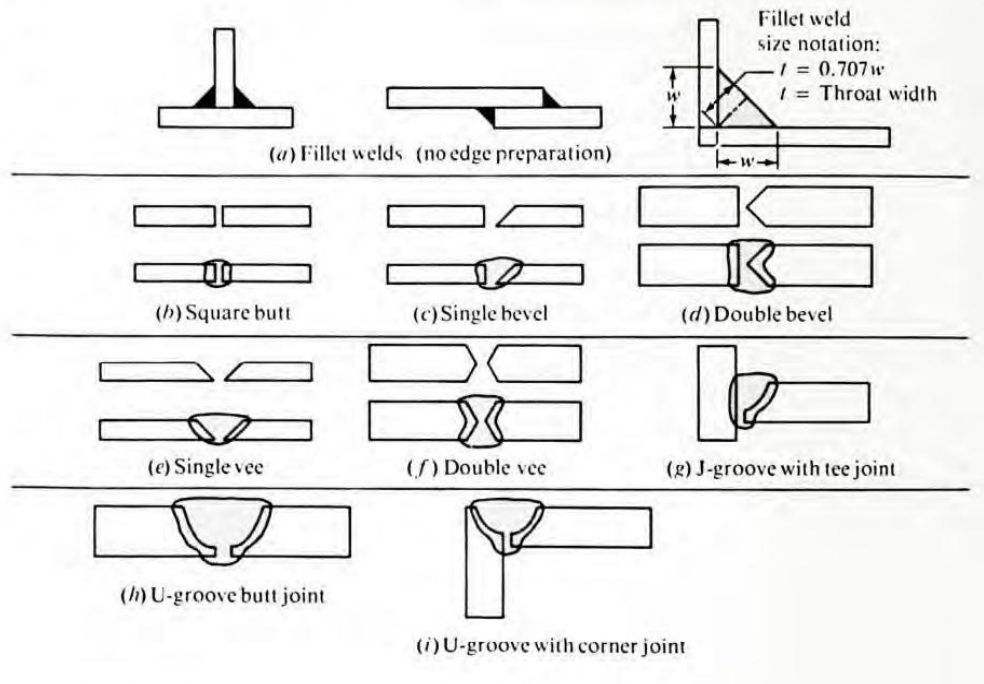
and (20-7) shows types and size of welded joints.
